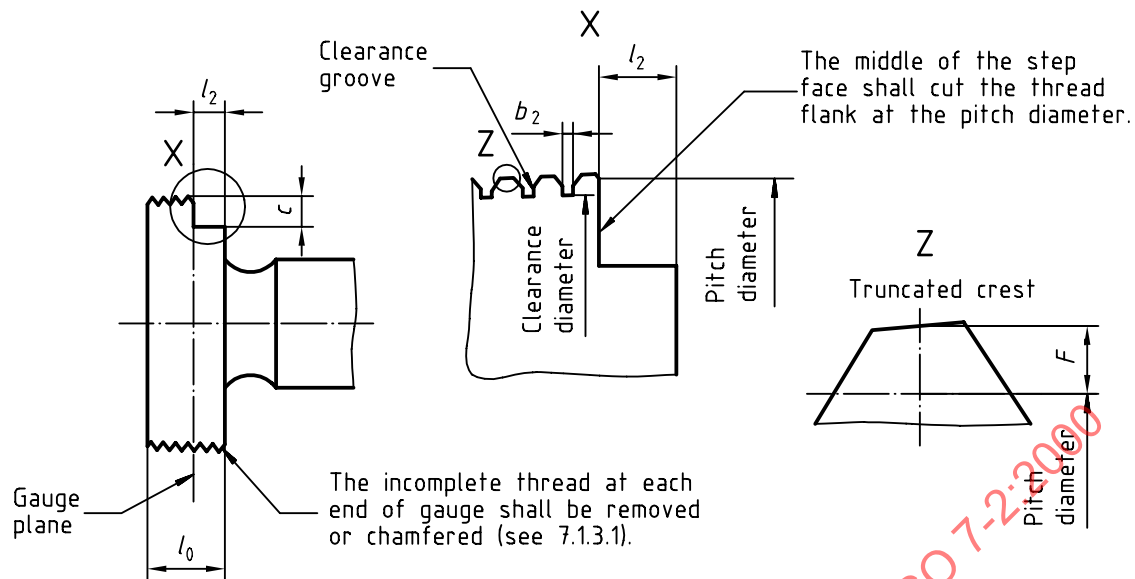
Taper modified thread form check plug gauge (gauge No. 5)
